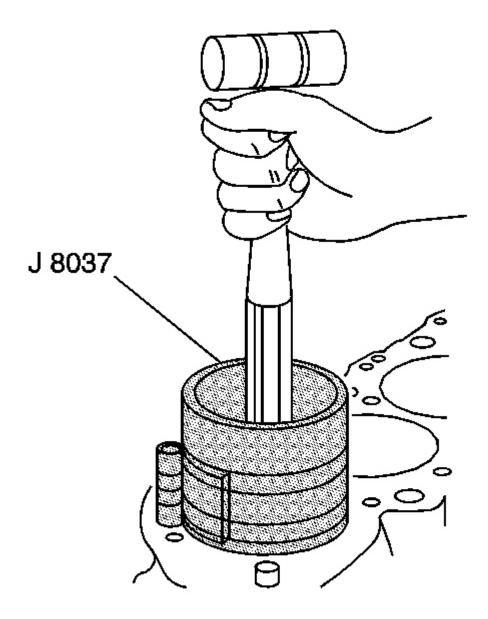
Installing Piston & Connecting Rod Assembly Into Engine Courtesy of GENERAL MOTORS CORP.
